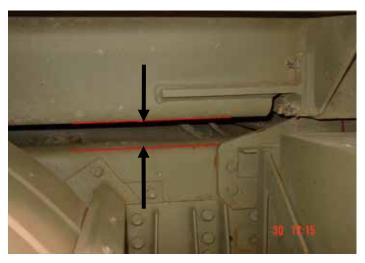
Measure the Gap Between the Chassis Rail and Tank Leg - Driver Side Front
